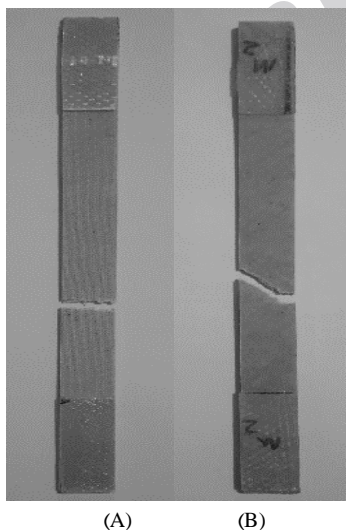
The cotton/epoxy specimens after A) tensile and B) shear tests
